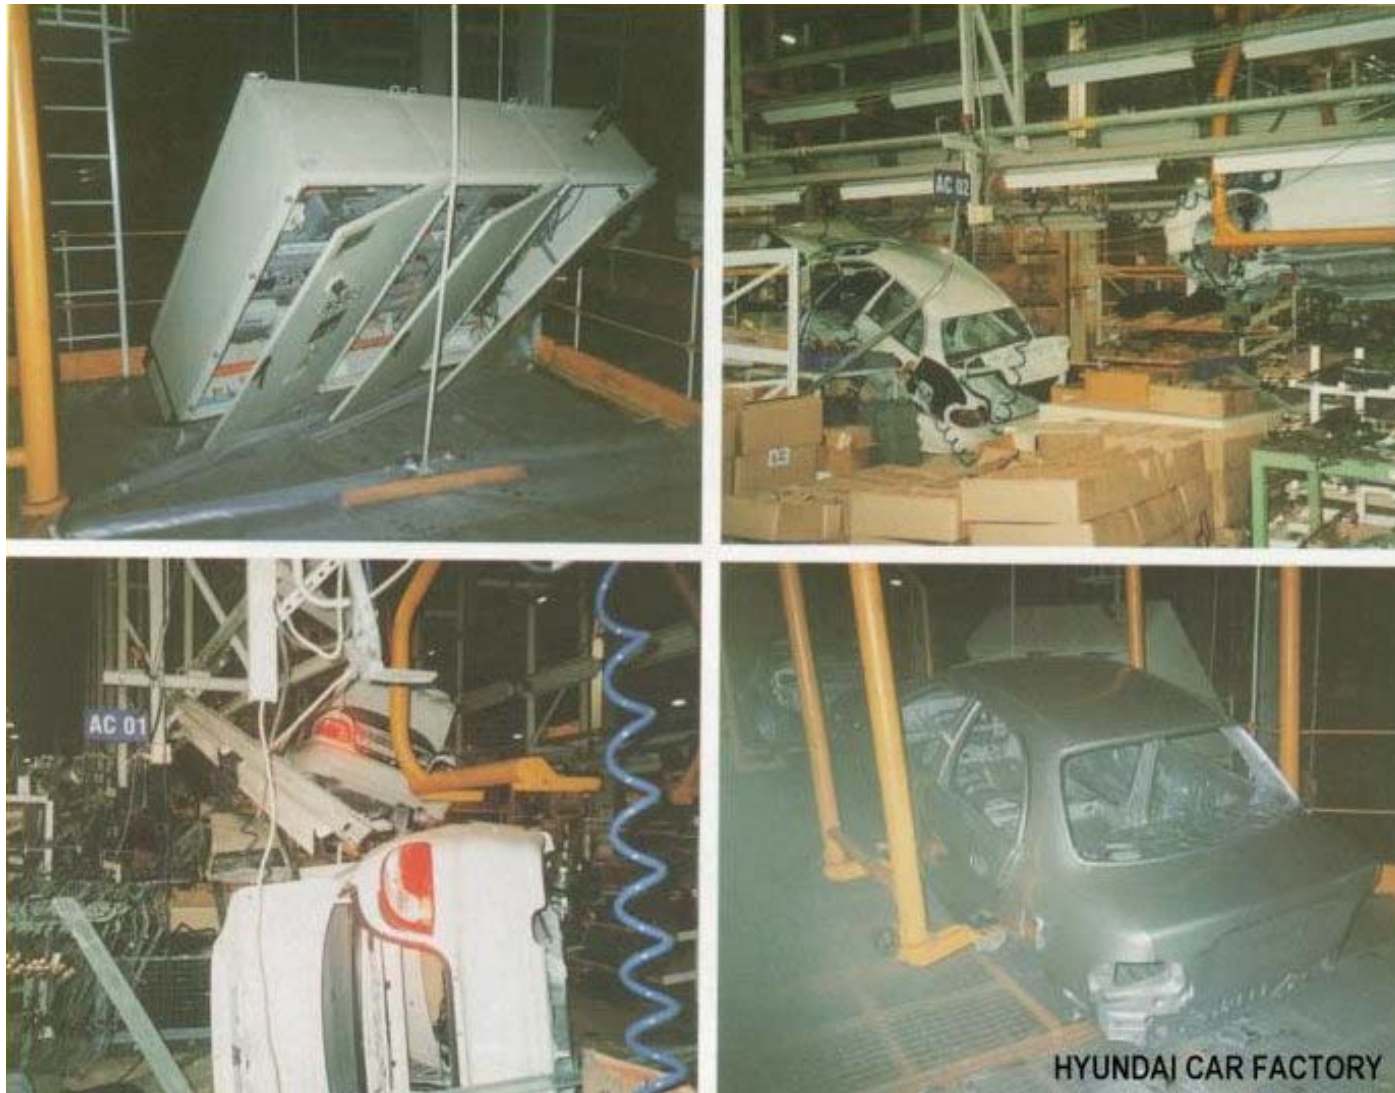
Equipment damage at Hyundai-Assan car factory (after Milli-Re).
